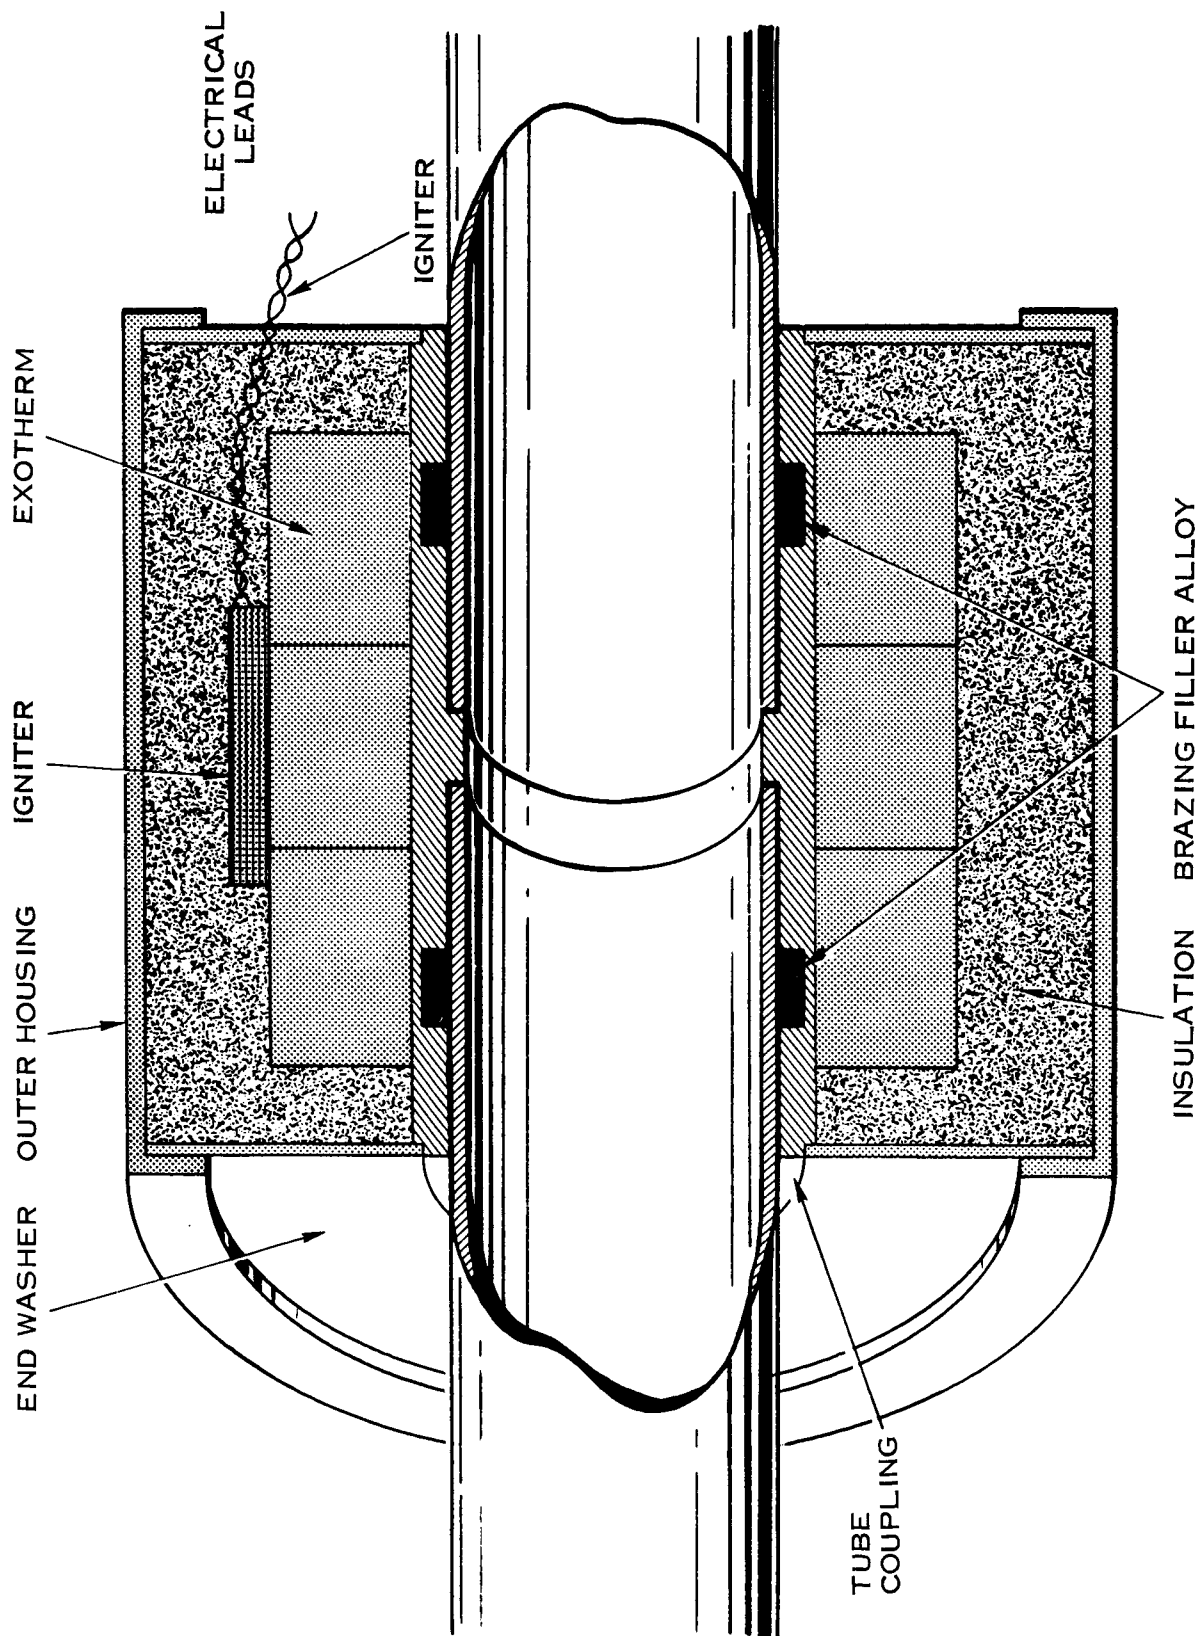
CUTAWAY VIEW OF PYROBRAZE TUBE COUPLING UNIT
